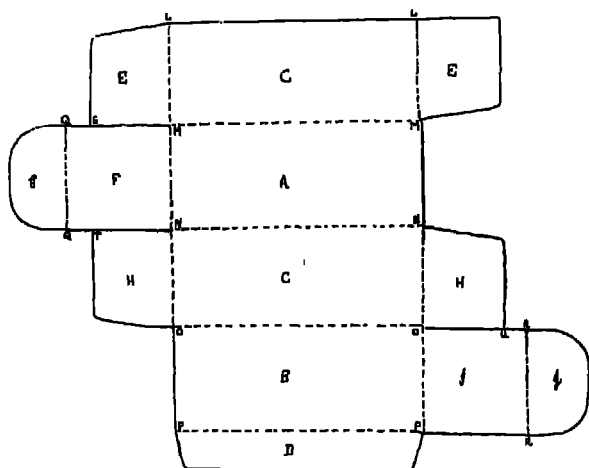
SINGLE-PIECE SHAVING STICK REFILL PACKET.
